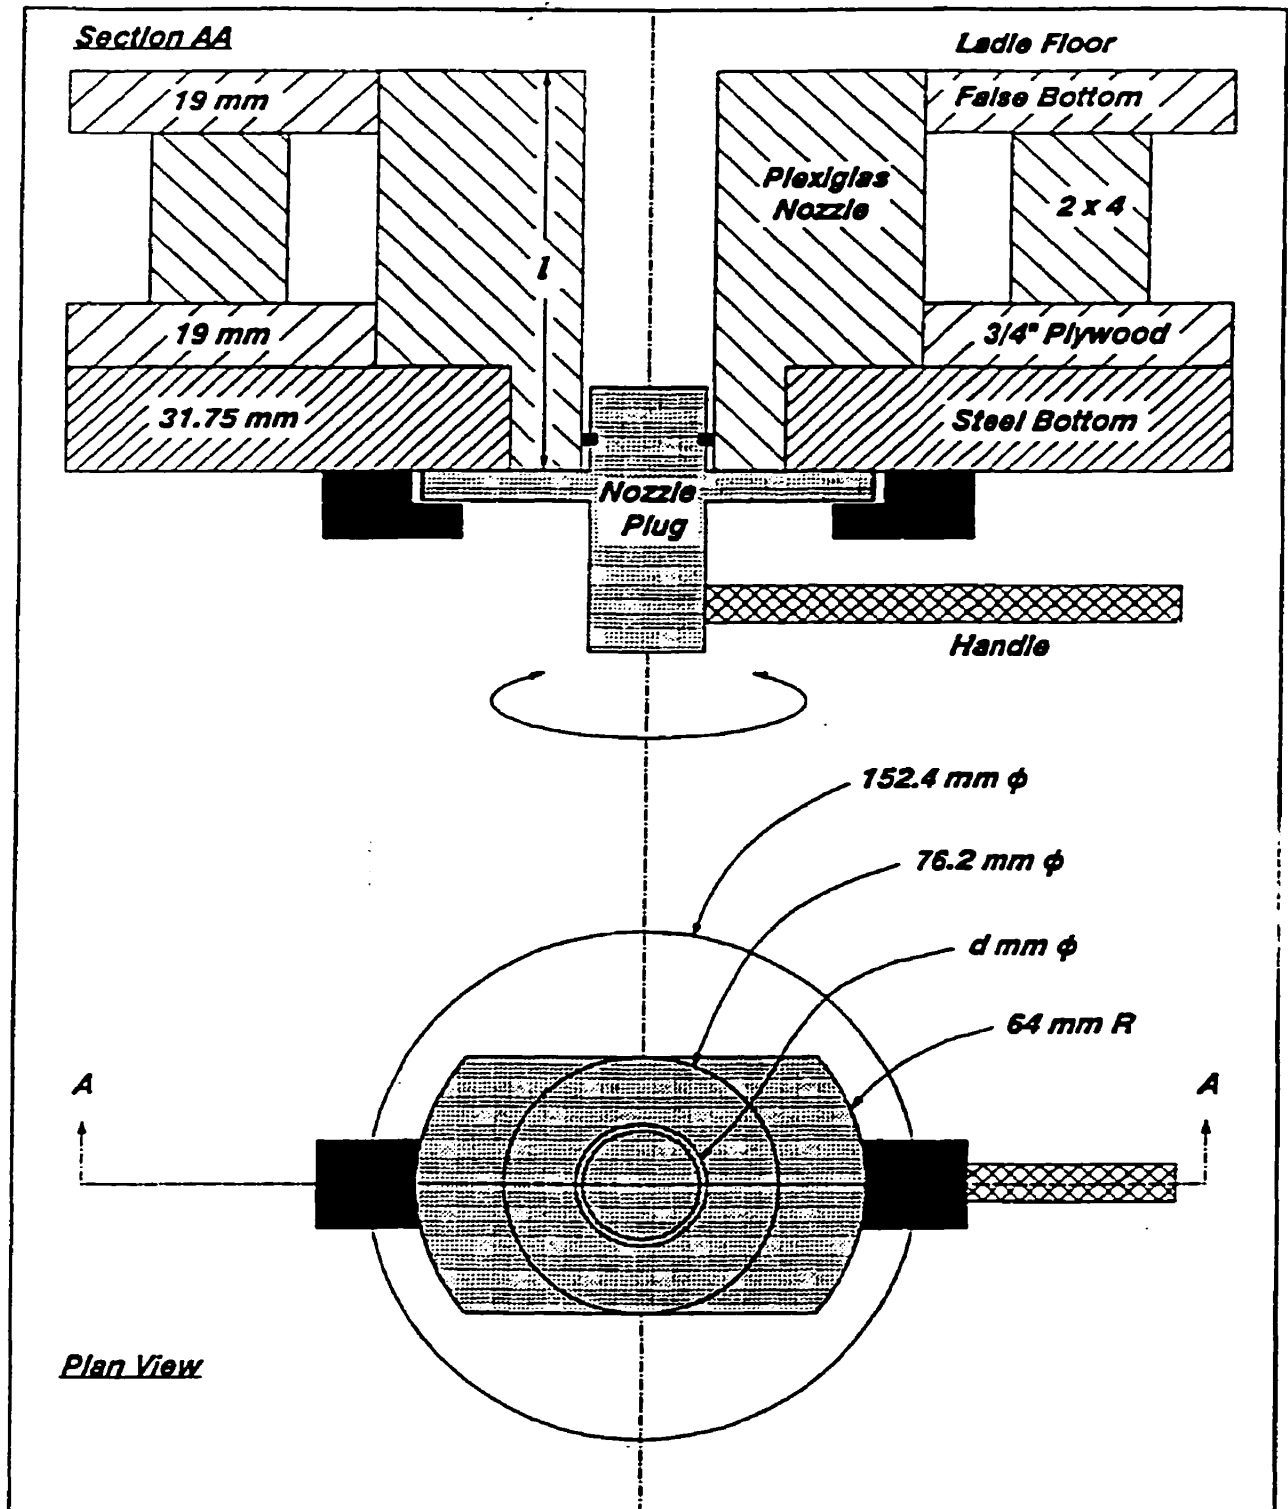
A sketch of the nozzle, nozzle holding adaptor, and nozzle plug used in the 1160-mm diameter ladle²
